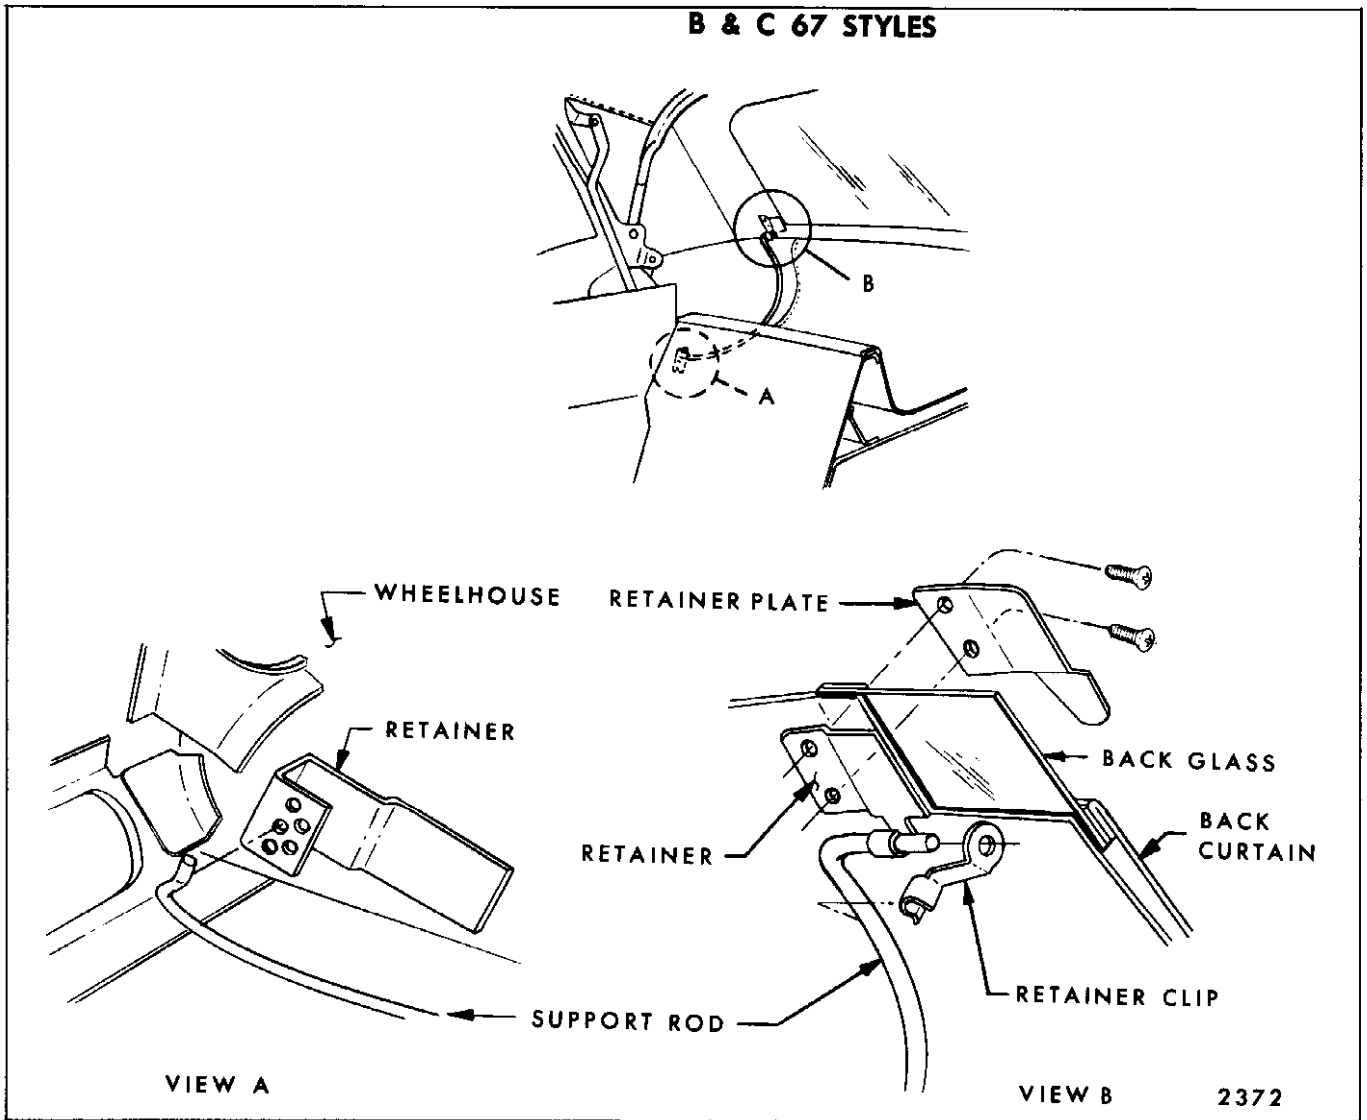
"B & C" Body Back Glass Support Rod Attachments
